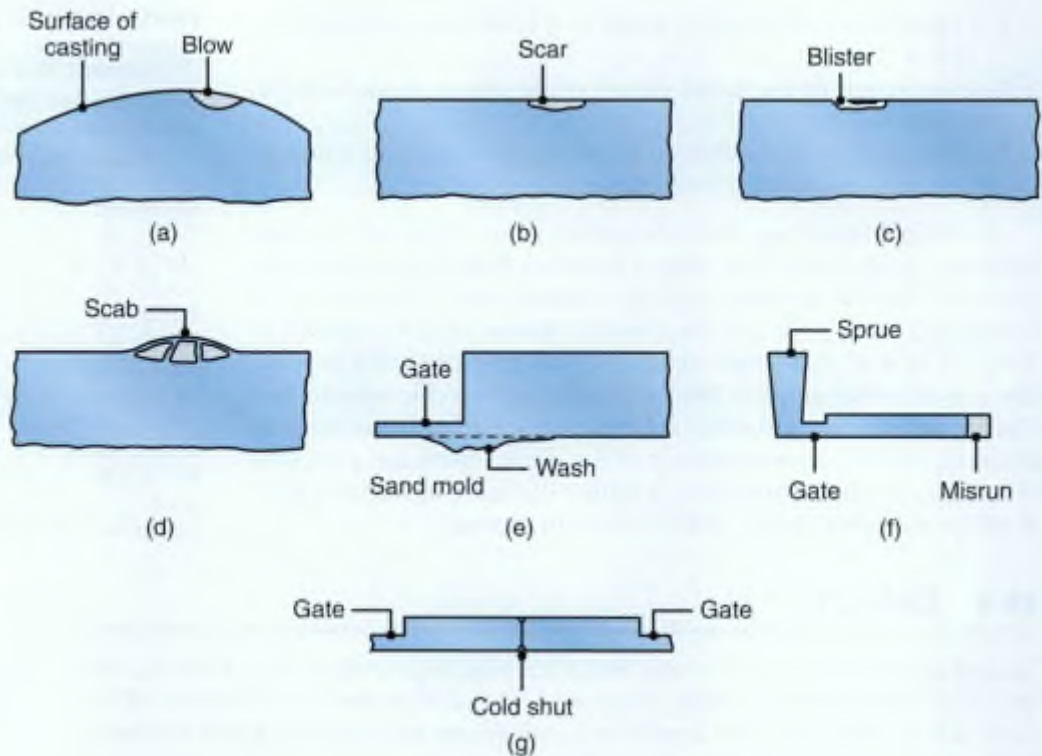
Examples of common defects in castings; these defects can be minimized or eliminated by proper design and preparation of molds and control of pouring procedures. *Source:* After J. Datsko.
